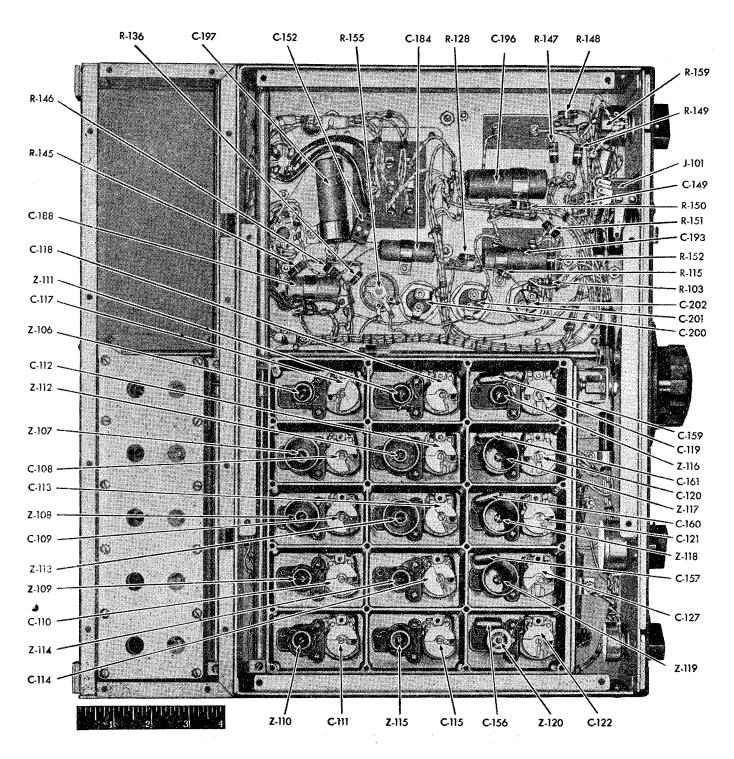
Bottom View of RAO-3 Radio Receiver Showing Power Supply, Audio Output Stage and Coils
